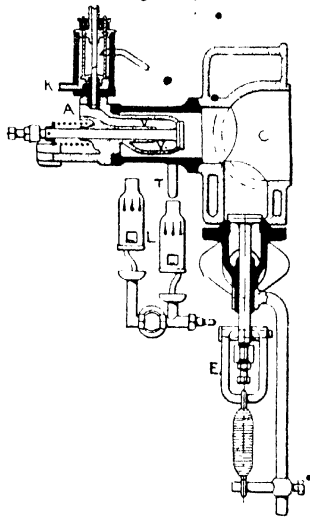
Vapour-feed vaporiser with tube igniter, used on Candall paraffin oil engines.
